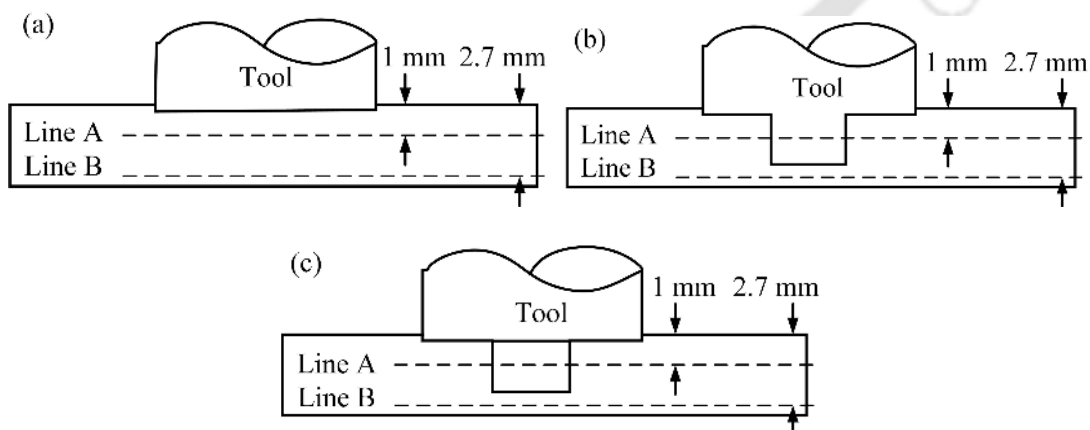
Schematic diagram of the cross section of the joint with position of the FSW tool shown as dotted line: (a) flat shoulder pinless tool (b) tool with pin (c) consumable pin
